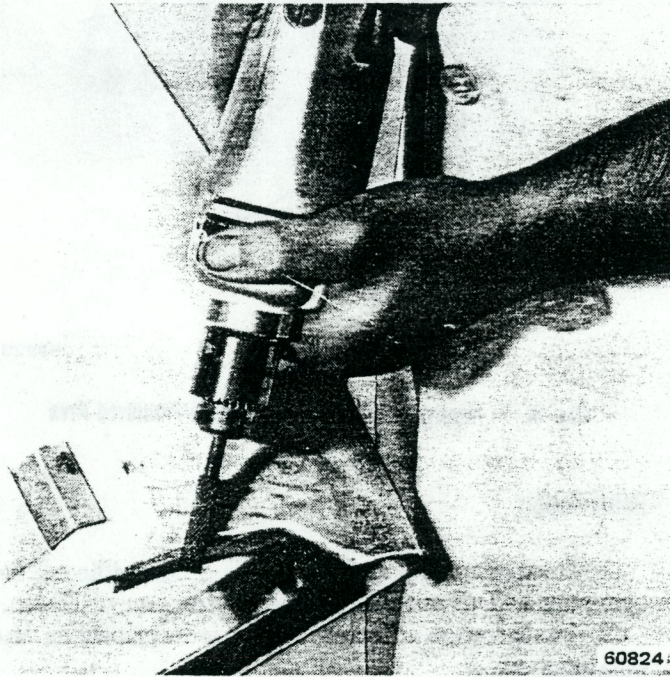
L-2 Beveling Edges of Broken Piece with Rotary File
